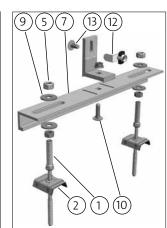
Solar fastener with storm washer and double flange, long
